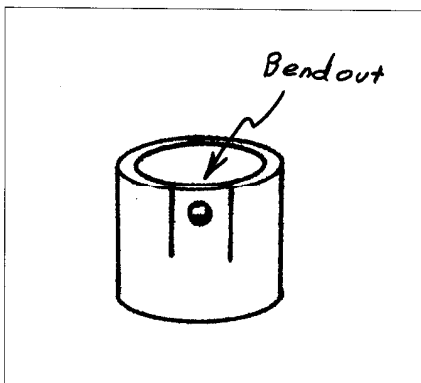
Use "telescope tubing" to make the positive contact, drill a small hole in it, cut a tab, and bend the tab out to make a solder point.
